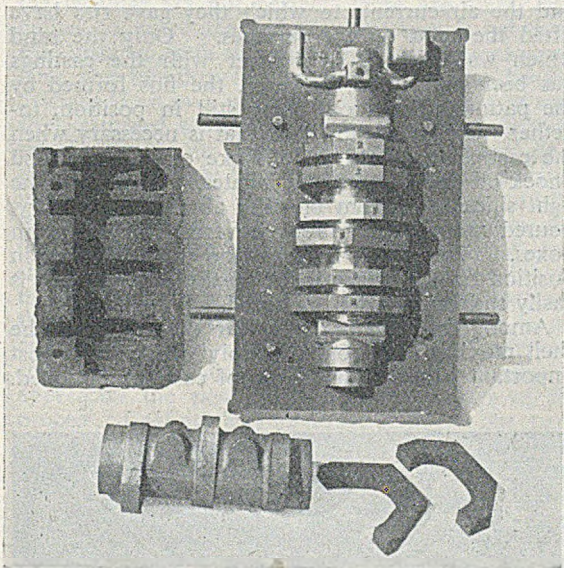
(Foreground and left) Camshaft Casting and its Half Shell for a Diesel Engine. Chills used on the Cams are also shown as well as a Pattern for a Larger Camshaft of Similar Design.
